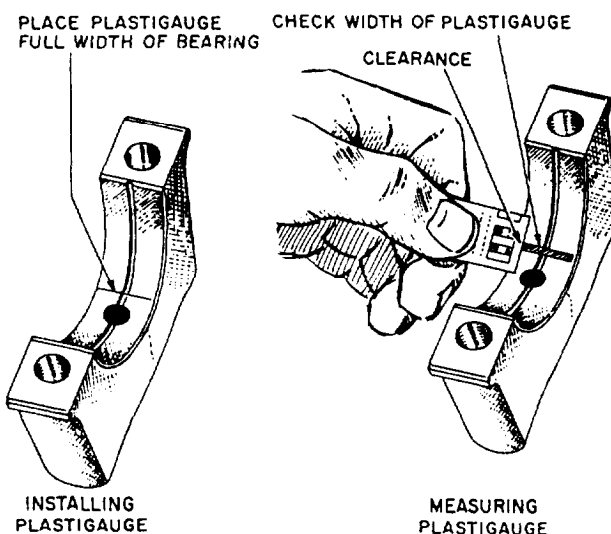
Checking bearing clearance with a Plastigauge.
